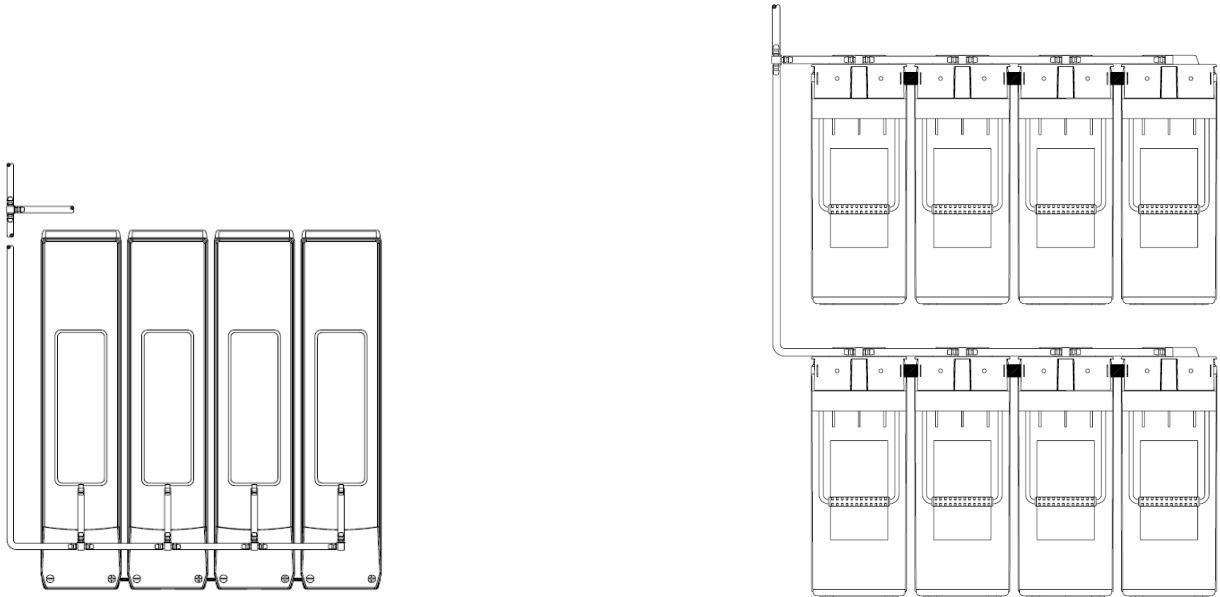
Venting kit assembly for 48 V battery string Fig. 5 Venting kit assembly for 2 x 48 V battery strings
